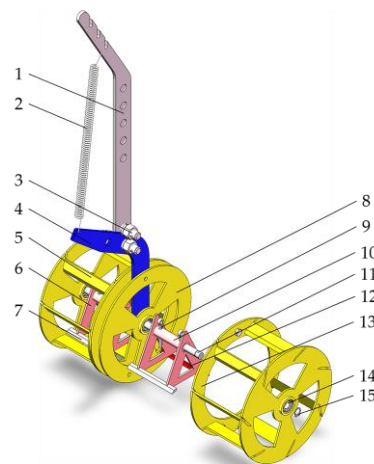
Schematic structure of combined paddy field inter-row weeding wheel. 1. Brace; 2. Imitation spring; 3. Hinged bolt; 4. Mounting bracket; 5. Dynamic blade; 6. Fixed-blade holder; 7. Pre-fixed blade; 8. Dynamic blade disc; 9. Split pin; 10. Bushing; 11. Fixed shaft; 12. Rear-fixed blade; 13. Blade ring; 14. Bearing; 15. Circlip.
